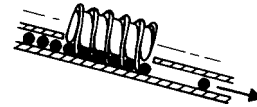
Lead screw feeder. Parts stack up behind the screw. Rotation of screw feeds parts with desired separation and timing.
